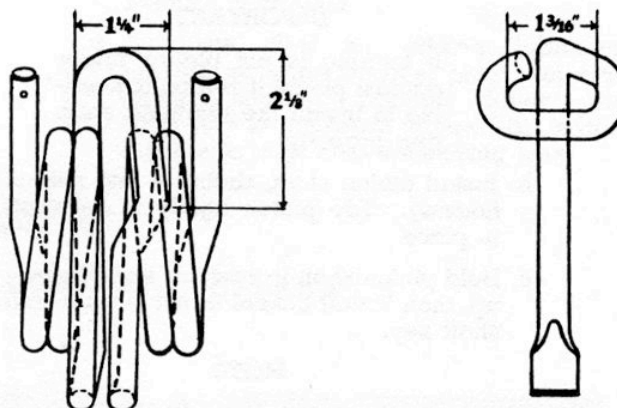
REMOVING TILLER PINION SHAFT NEEDLE BEARING
